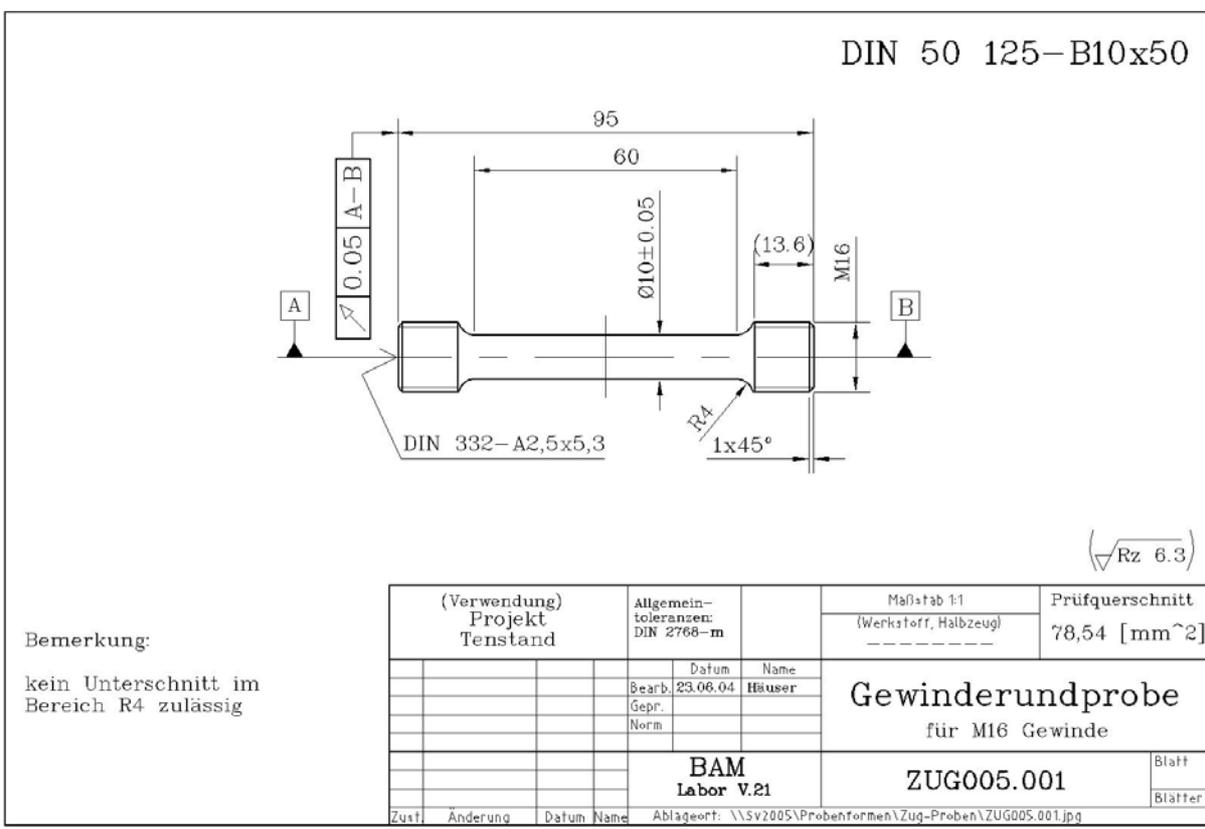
Test piece geometry according to DIN 50125 for cylindrical threaded samples of S355 and 316L
